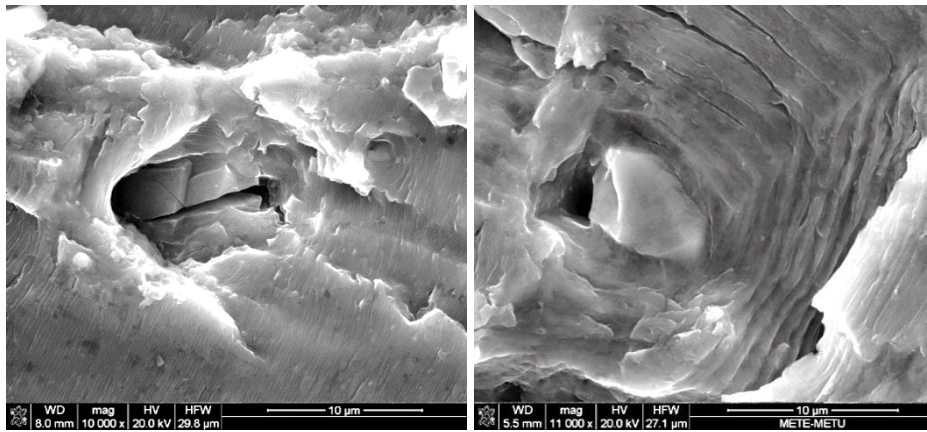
Secondary particles on the fracture surfaces of the base metal.
